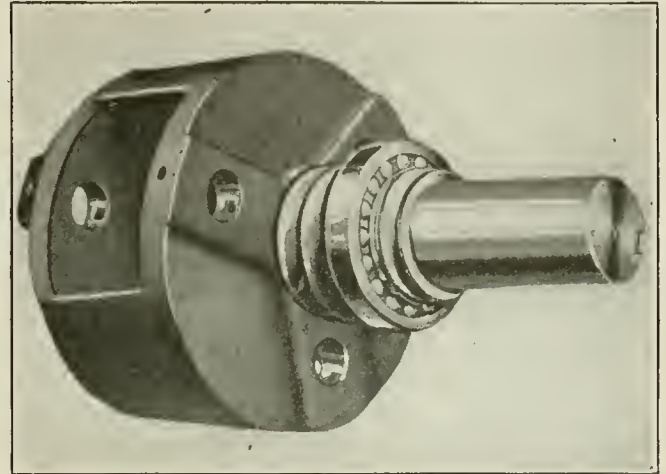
THE CARRIER AND SLOW-SPEED BEARING
